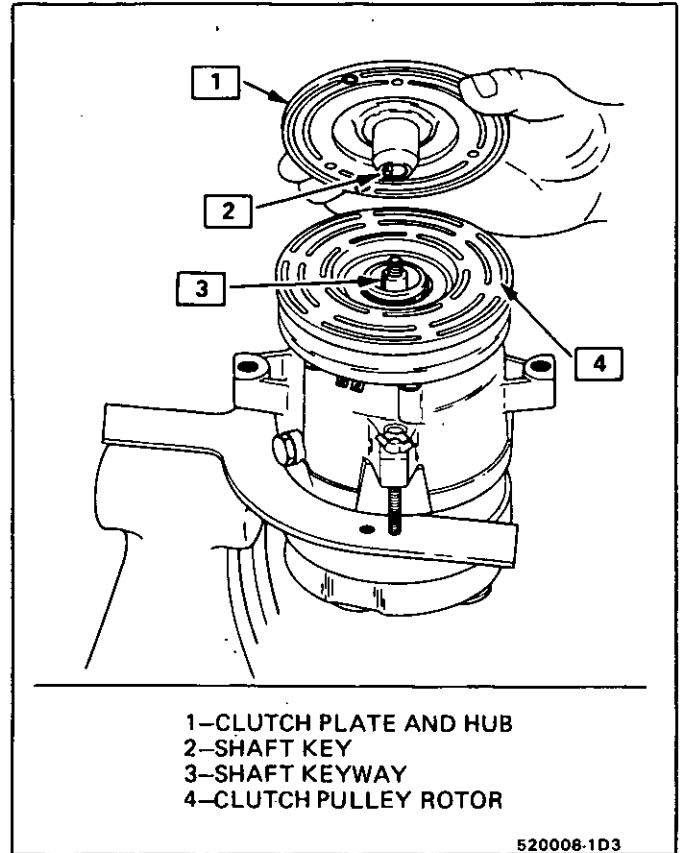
Shaft Key, Clutch Plate/Hub Installation
